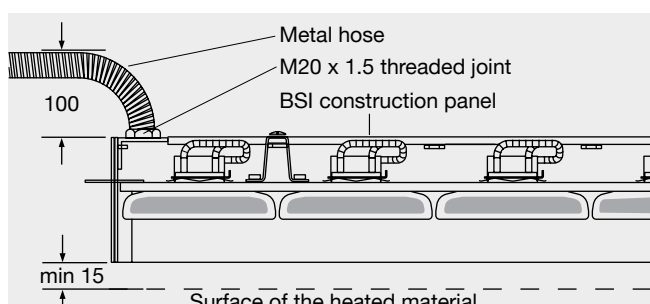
Arrangement of the connection unit for establishing the mains connection. Dimensions in mm
